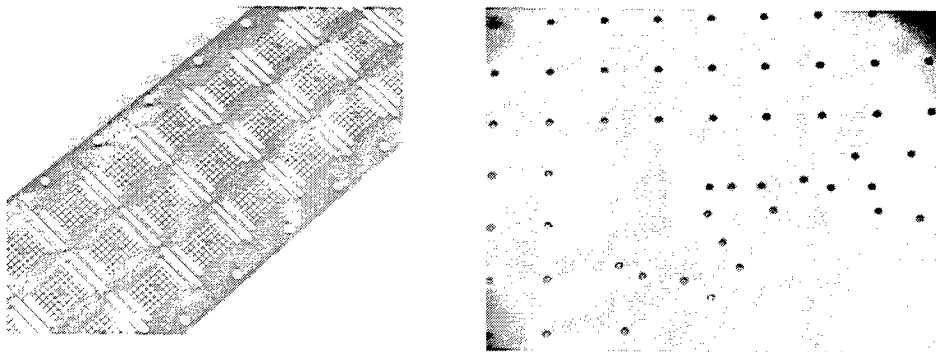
Drilled Arrays on TAB & BGA Package Inner Layer
